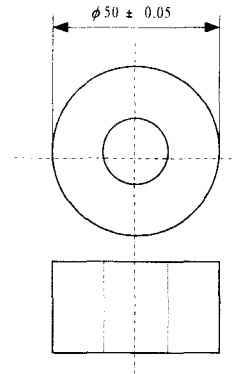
A mechanical part for an experiment of the automatic tool compensation
